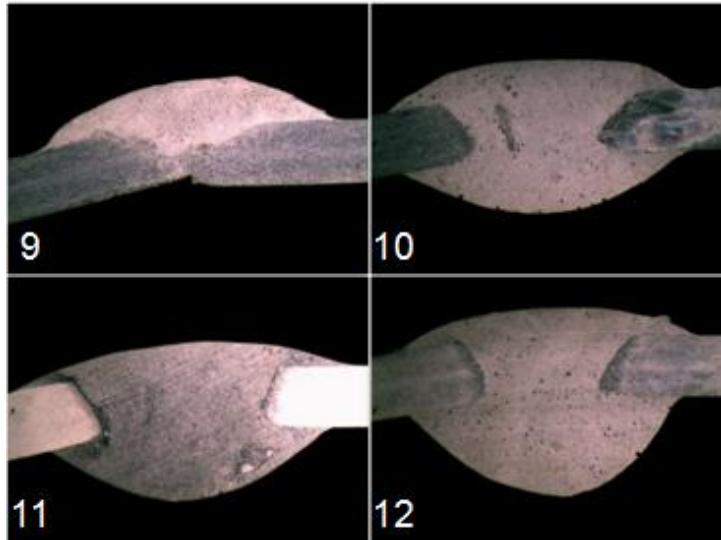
Cross section of welding samples with respective numbering by using filler ER4047
